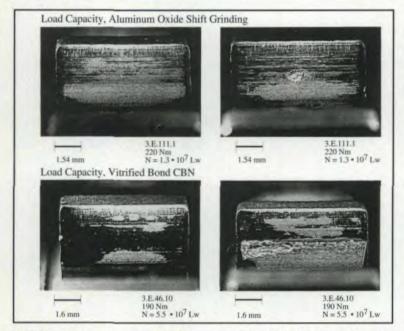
Wear and pitting on aluminum oxide and CBN ground gears (Variants 111, 46).
